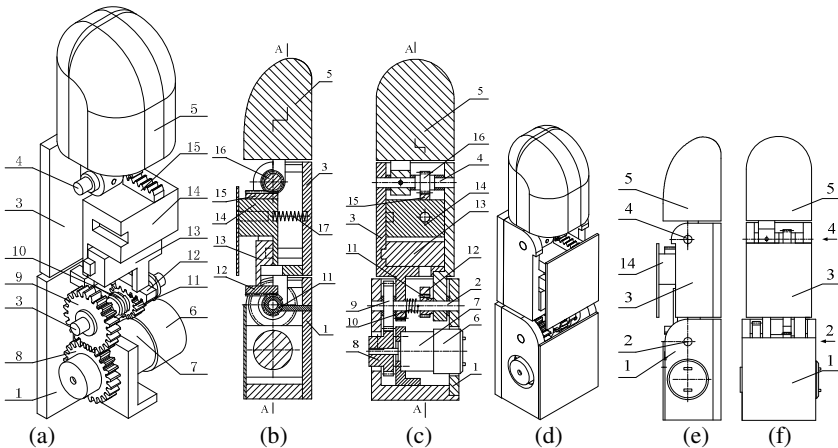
Mechanical design of 2 joints COSA-GRS finger. 1-base; 2-proximal joint-shaft; 3-proximal phalanx; 4-distal joint-shaft; 5-distal phalanx; 6, 7-DC gear motor; 8, 9-gear; 10-torsion spring (adjusting grasping force); 11-lower gear; 12-lower rack; 13-lower slider; 14-upper slider; 15-upper rack; 16-upper gear; 17-compression spring.
